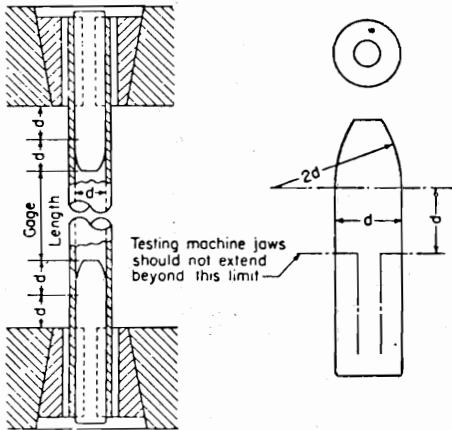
Metal Plugs for Testing Tubular Specimens, Proper Location of Plugs in Specimen and of Specimen in Heads of Testing Machine.
